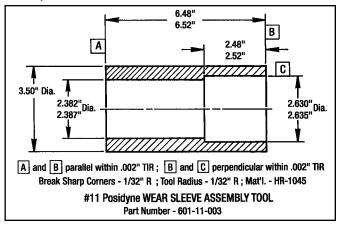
Wear Sleeve Assembly Tool (#11 & #14 Posidyne)
